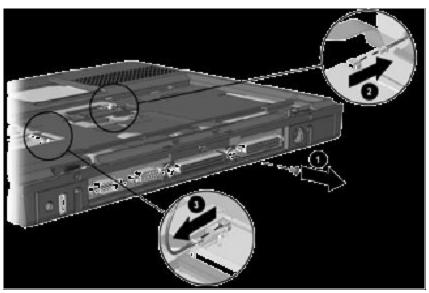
Removing the Top Cover Rear Panel Screw and Disconnecting the Speaker Cables
